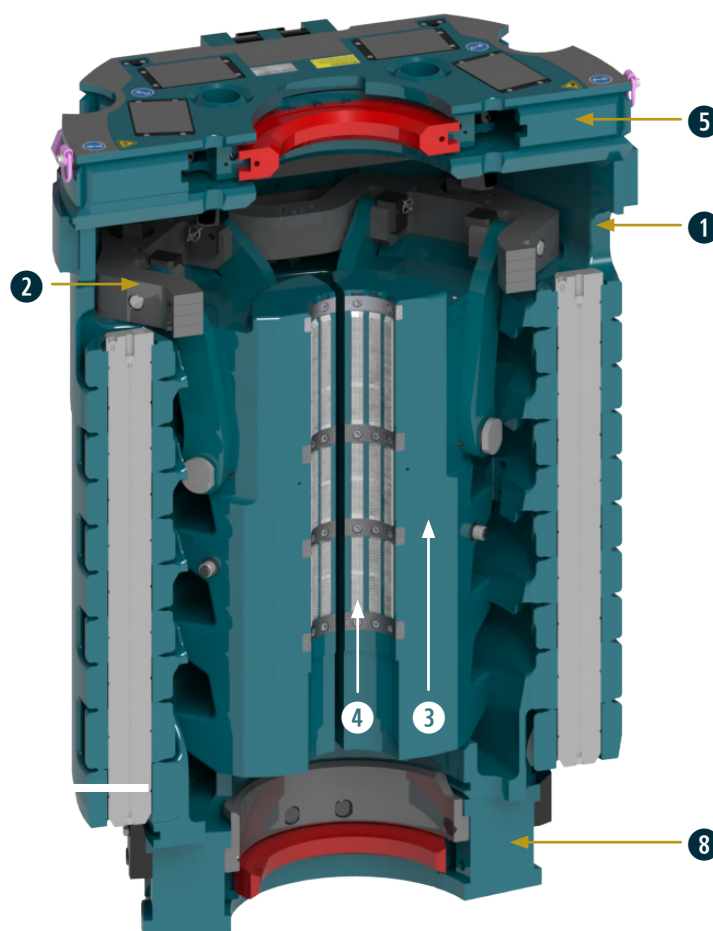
PS 1250 with Slip, Carrier and Bottom Guide Assembly
